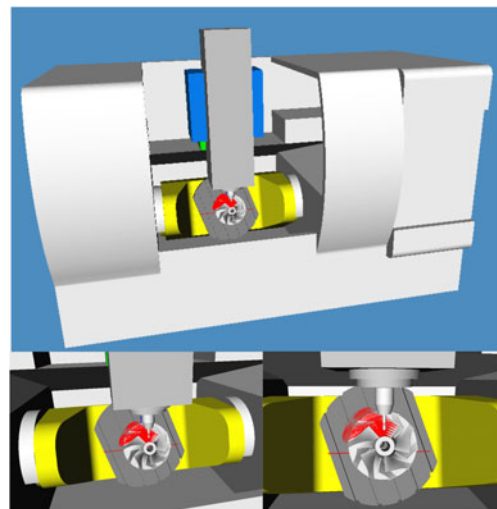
Virtual machine simulation results for AC type table-tilting five-axis machine tool
